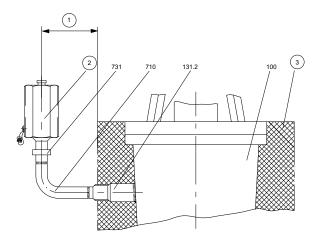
UGS/UGSV body pressure relief valve on gate valve in pressure seal design
